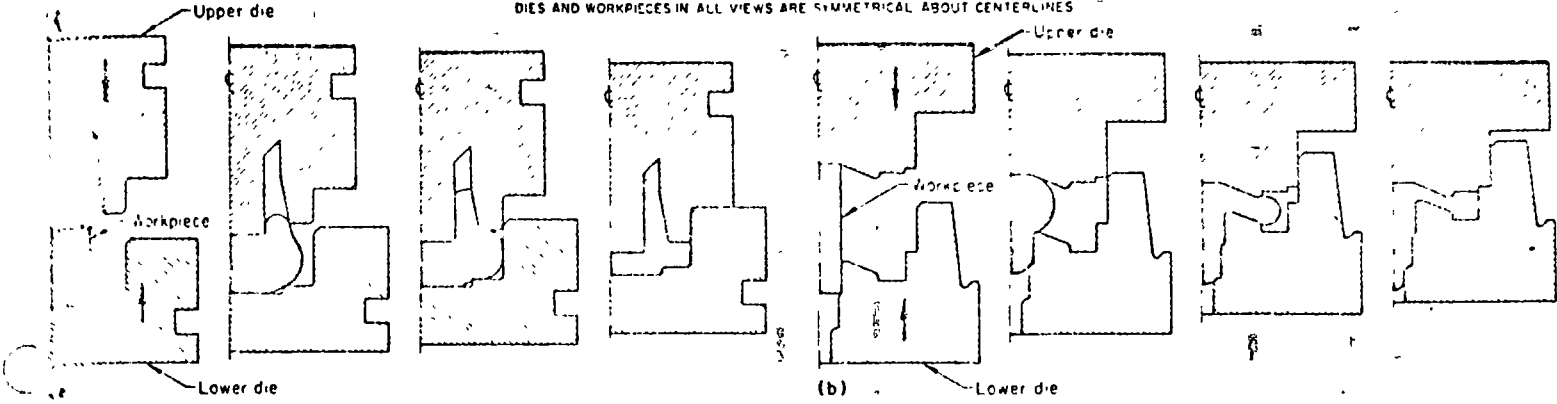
Metal flow in upset: (a) upsetting and backward extruding a welding neck flange; (b) upsetting and forward extruding a gear shaft
